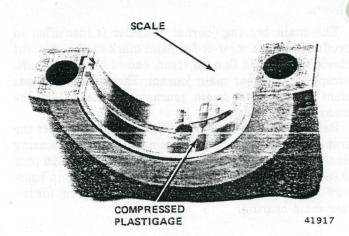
B-149 Measuring Main Bearing Clearance with Plastigage
